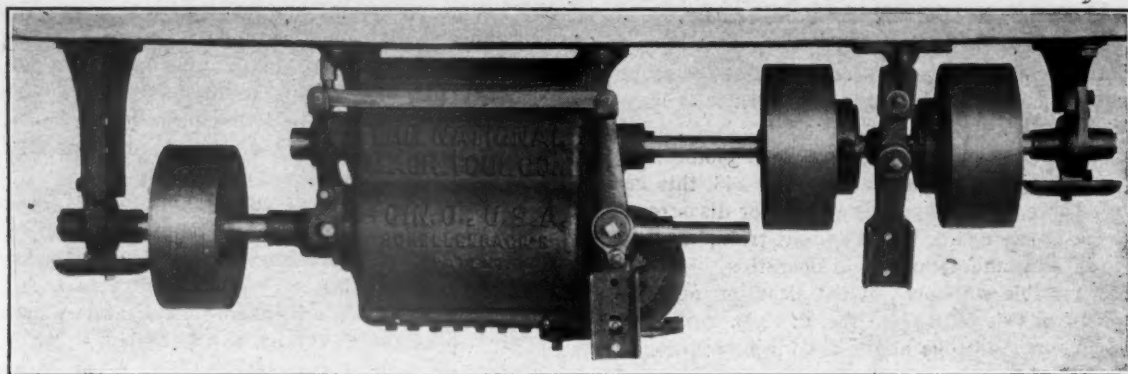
EXTERIOR VIEW OF THE SPEED "VARIATOR," AS EQUIPPED WITH REVERSING CLUTCHES FOR LATHE DRIVING.
